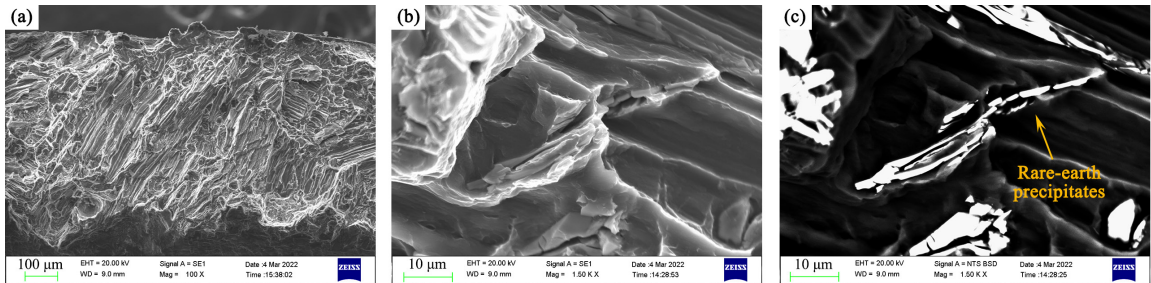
Fracture of the welded joint. (a) fracture, (b~c) SEM/BSE image of precipitates on the surface of the fracture.
